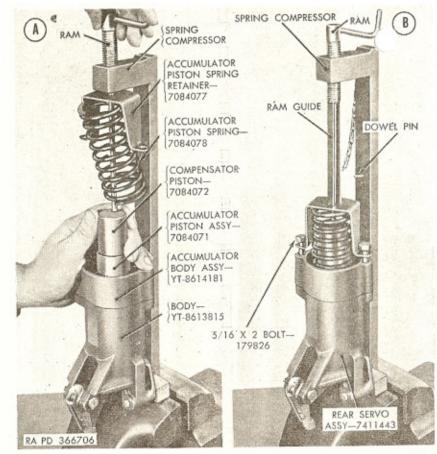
Use of rear serve spring compressor-C7950334 for assembly.
